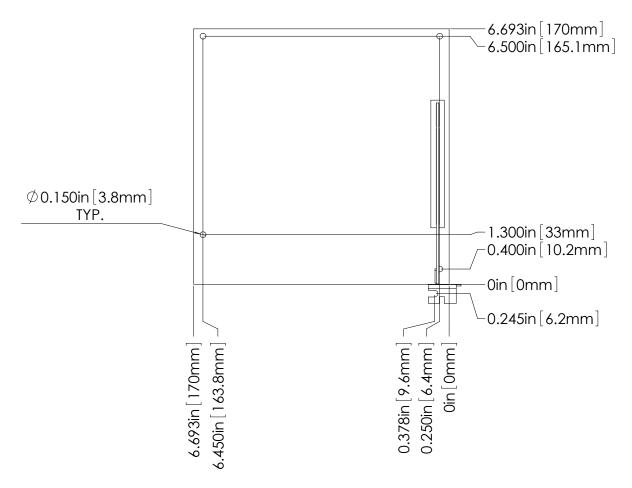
mini-ITX board top view, with overall dimensions and mounting points
